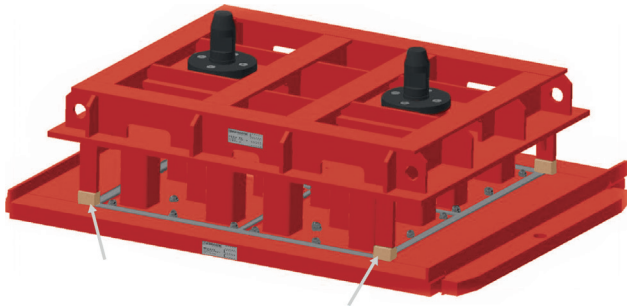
Mold prepared for the assembly on the machine with spacers provided between the die and the compression head limiter.
